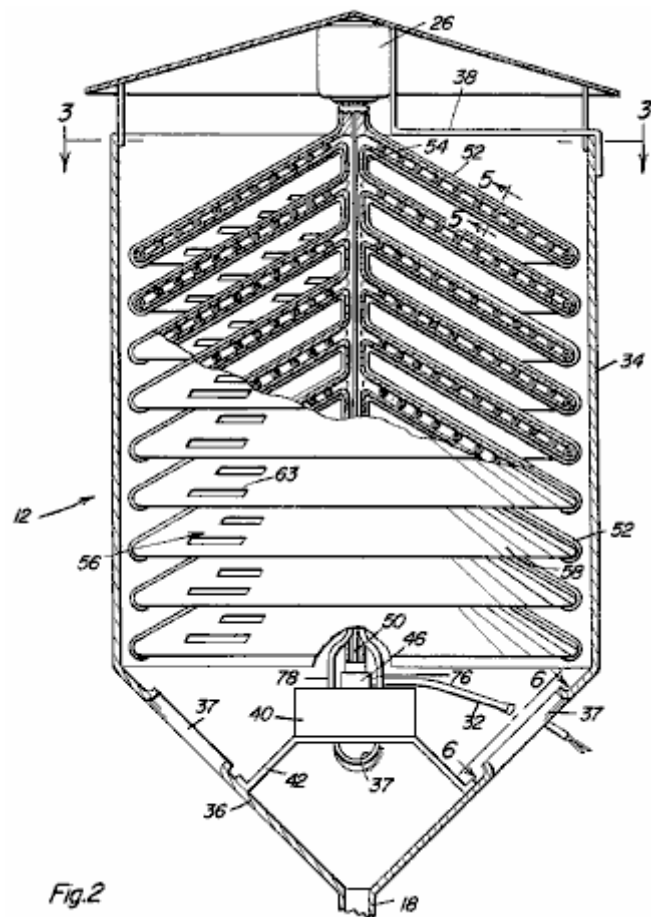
is a partial sectional view with parts shown in section of the apparatus.
